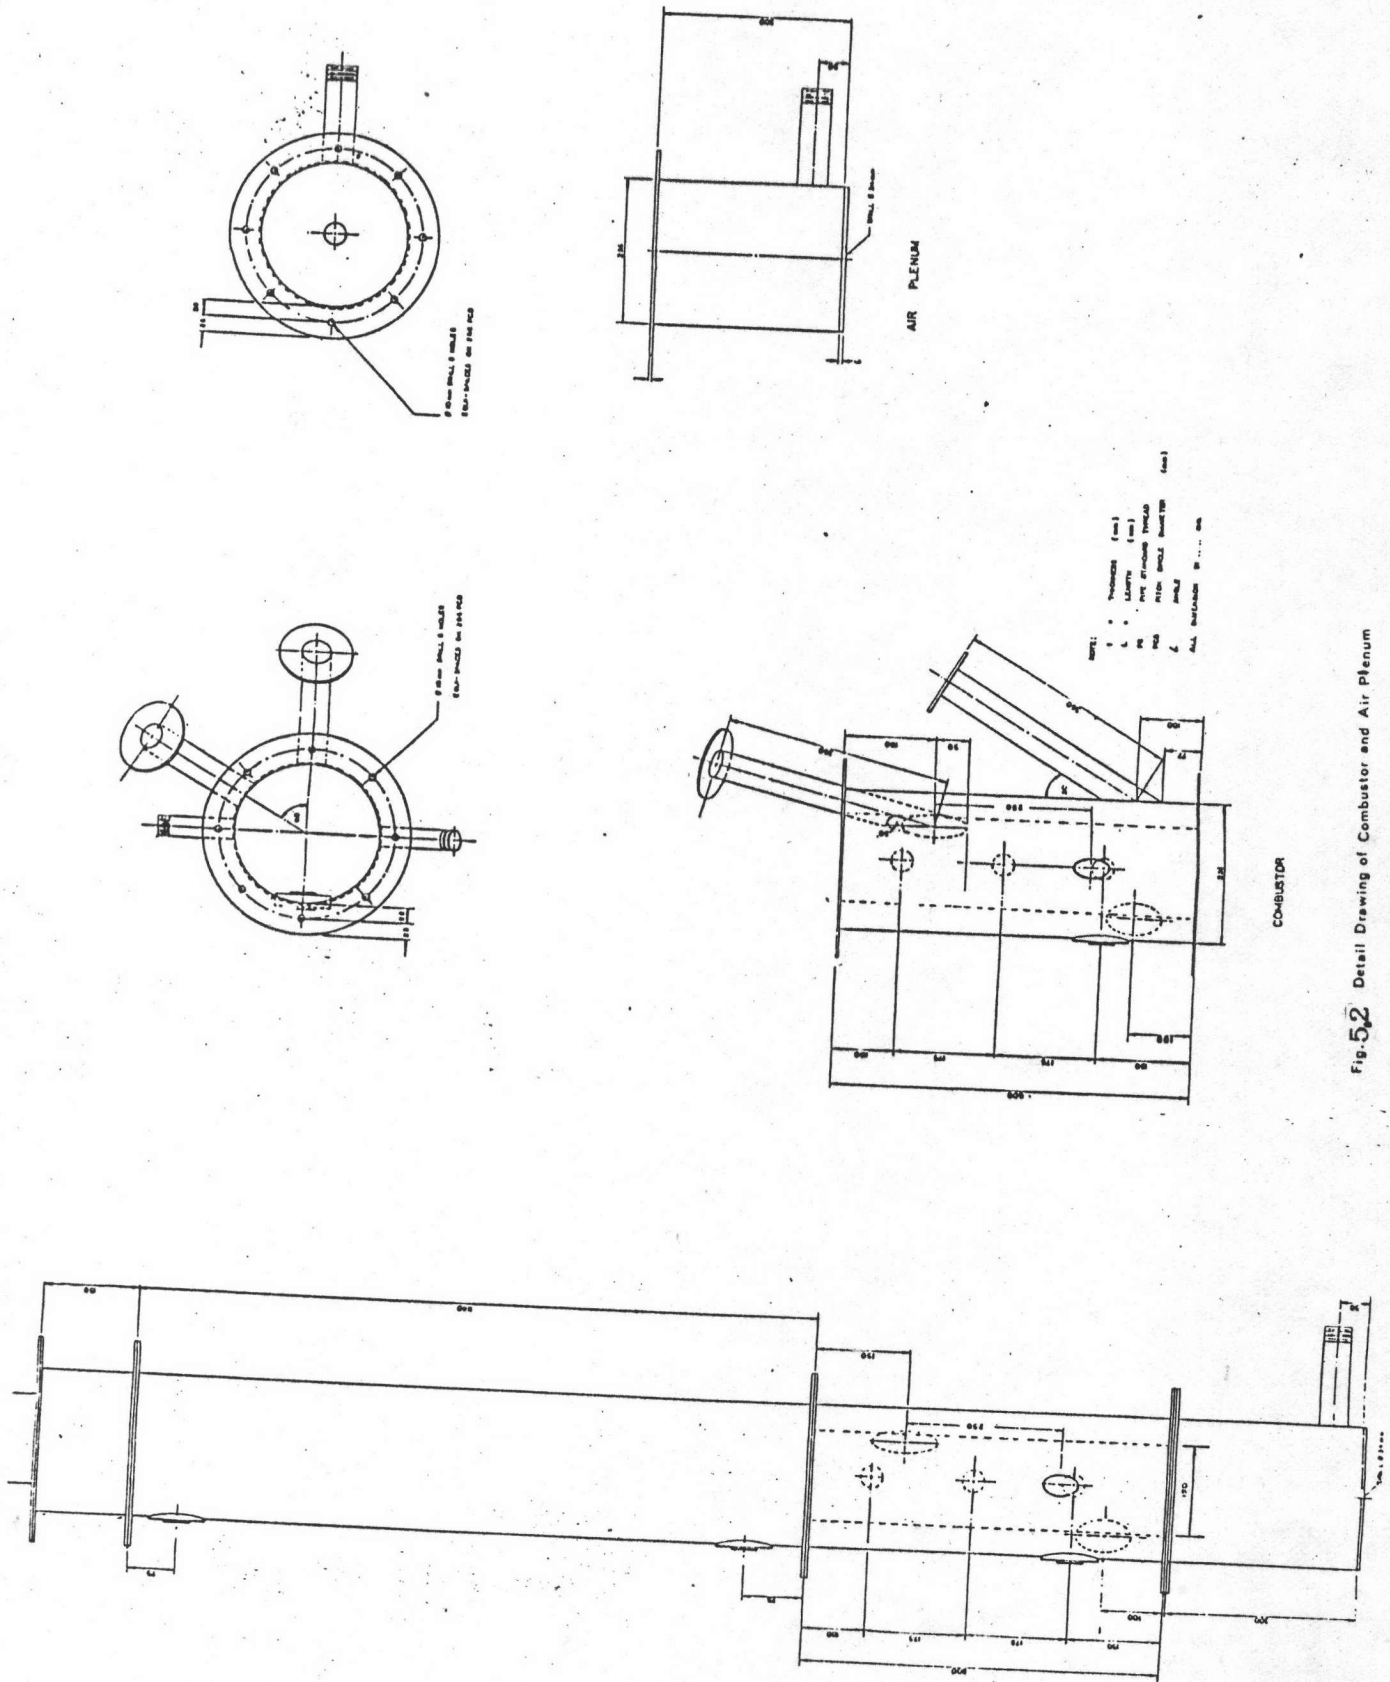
Detail Drawing of Combustor and Air Plenum
